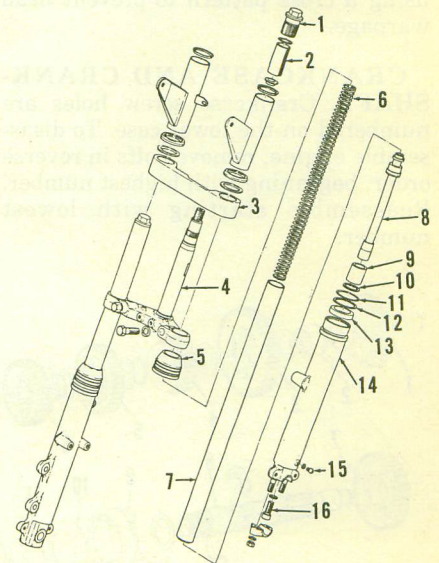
Exploded view of front suspension used on models RD350 and RD350A. Models RD250 and RD250A are similar.
